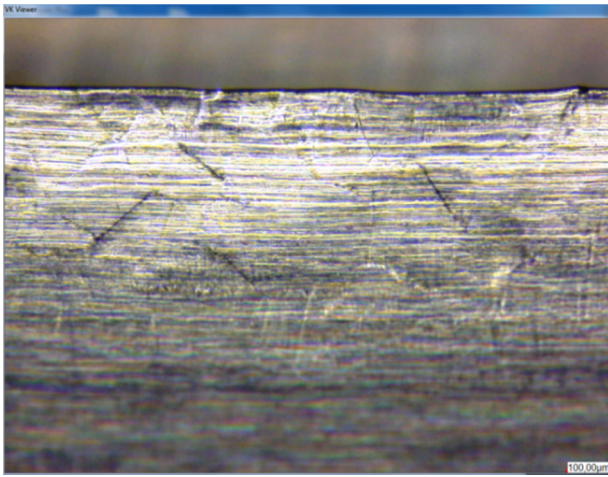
3D picture of microscope inspected the knife edge of CF flange (rectangle to the 20 ° knife position).
